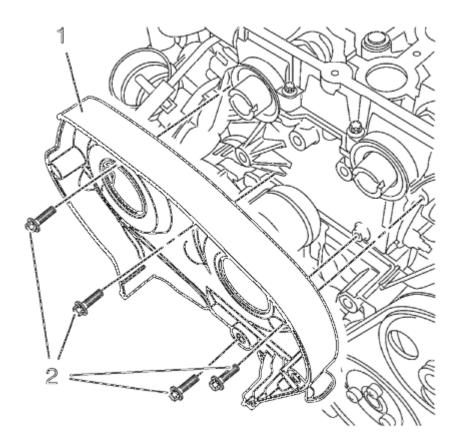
Installing Fixture Plate, Bolts, & Bushing Courtesy of GENERAL MOTORS COMPANY
